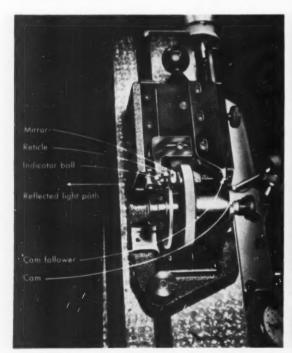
Staging fixture which was developed by Optical Gaging Products, Inc., for checking cam contours
